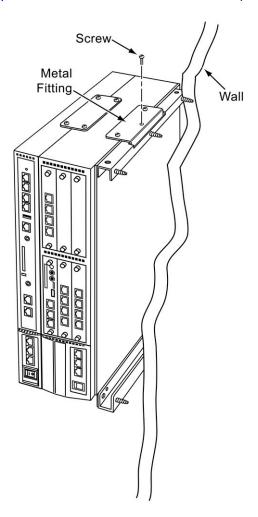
Secure Metal Fitting to Upper Wall Mount Bracket with a Screw
